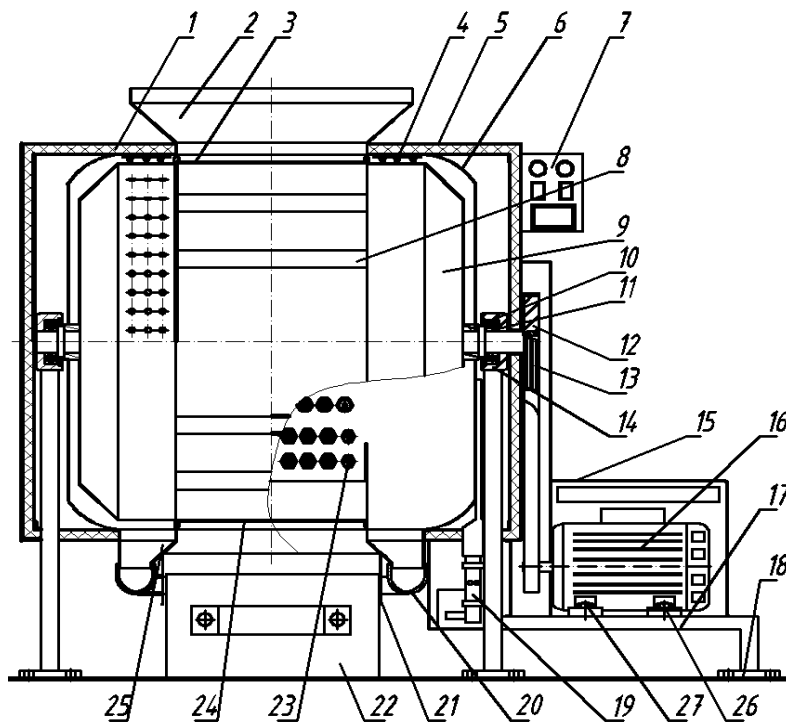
Apparatus for cleaning onion ACO-10/160: 1 – insulation; 2 – bin boot; 3 – bolt boot; 4 – nozzles for feeding water; 5 – external cladding; 6 – inner lining; 7 – remote control; 8 – segments; 9 – perforated drum; 10 – clip drum; 11 – bearings; 12 – a pulley; 13 – belt; 14 – bearing bearings; 15 – motor housing; 16 – motor; 17 – the reference frame; 18 – console support; 19 – electrode steam generator; 20 – pipe; 21 – shade protection; 22 – the collection tray; 23 – a collection of nozzles; 24 – bolt boot; 25 – transfer tube; 26 – a bolt; 27 – nut
